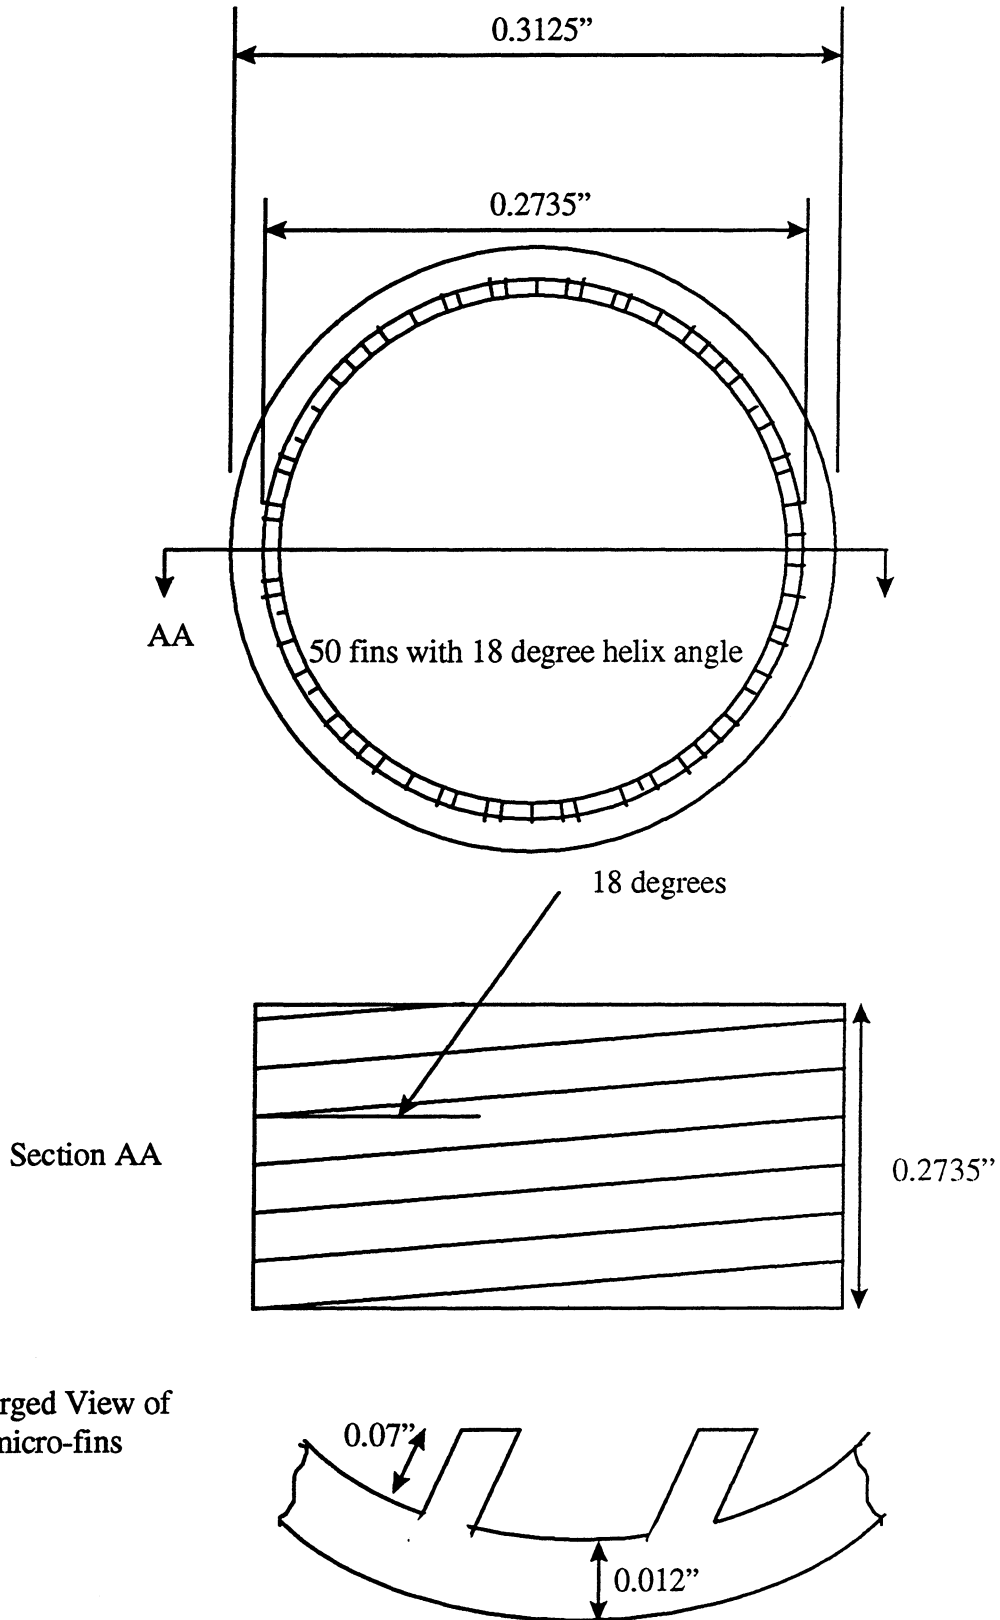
Micro-fin tube dimensions and features for 8.93 mm inner diameter micro-finned test section
